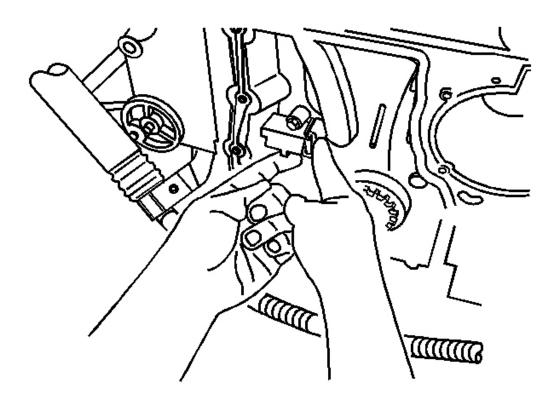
Releasing Timing Chain Tension Courtesy of GENERAL MOTORS CORP.
